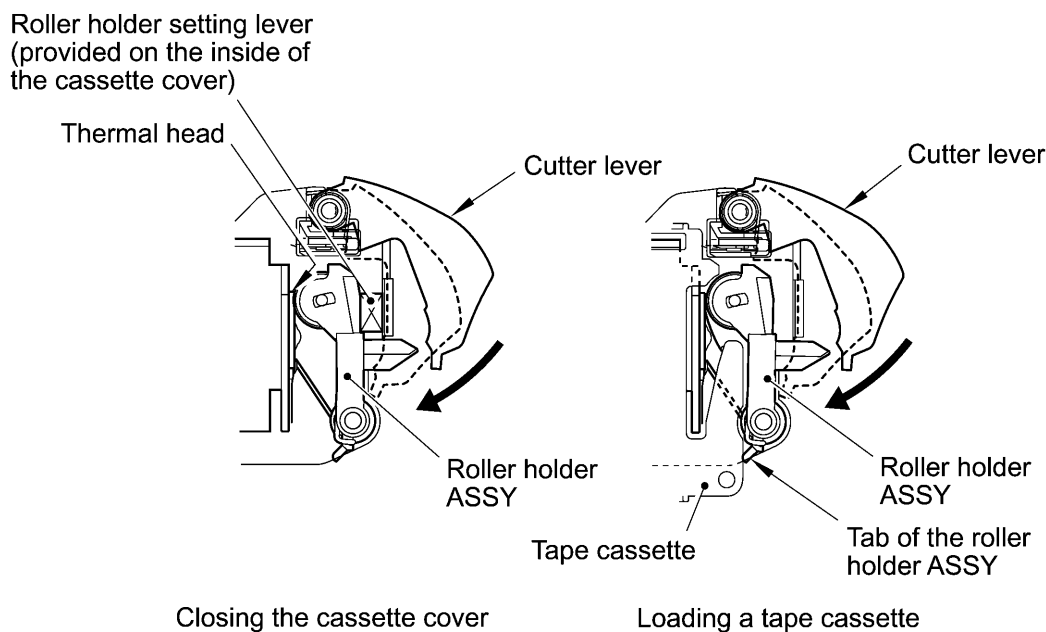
Releasing the Cutter Safety Lock Mechanism
